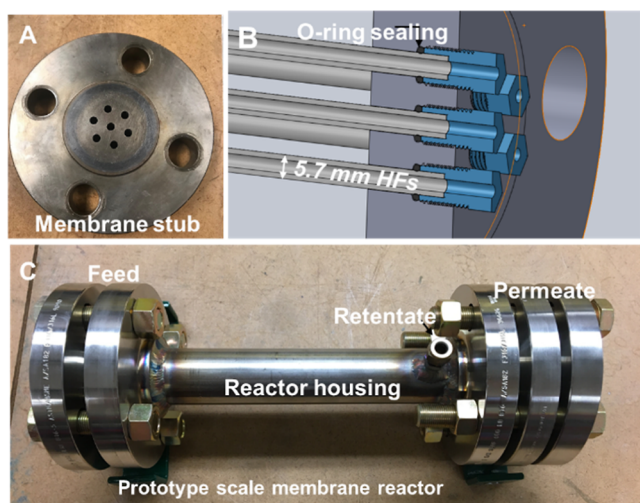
Design of the prototype-scale bifunctional catalytic membrane reactor: (A) picture of the membrane stub in which seven hollow fiber membranes can be installed; (B) 3D cross-sectional view of the membrane reactor with O-ring sealing; and (C) picture of the prototype-scale membrane reactor.
